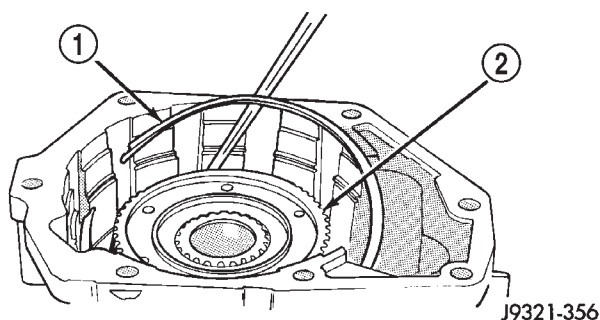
Overdrive Clutch Reaction Snap Ring Removal/Installation
